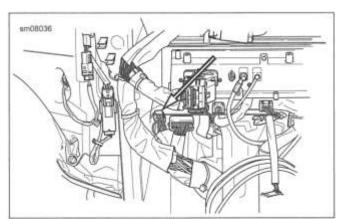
TGS Connector: Fork-Mounted Fairing Models
